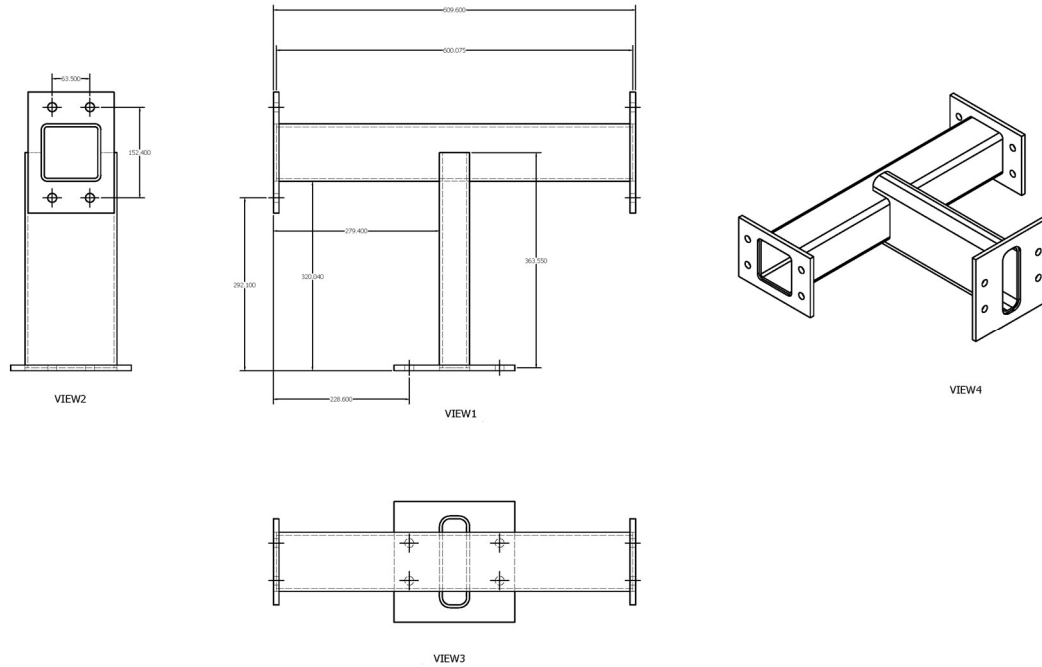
Geometrical details of the RHS T-joint welded structure (dimensions are in mm)
